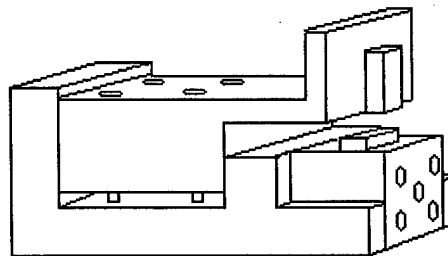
The copper heatsink redesigned to allow a laser already mounted on a C mount heatsink to be integrated into the module.
